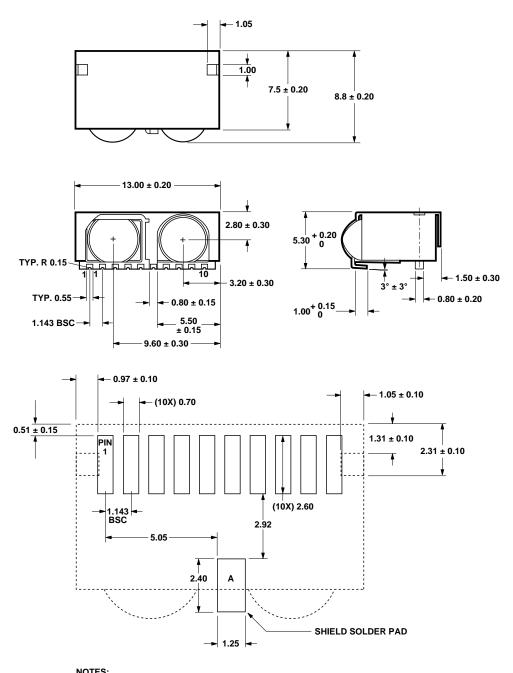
Package Outline with Dimension and Recommended PC Board Pad Layout. (Integrated EMI Shield with Guide Pins – Part Number: HSDL-2300#001.)
